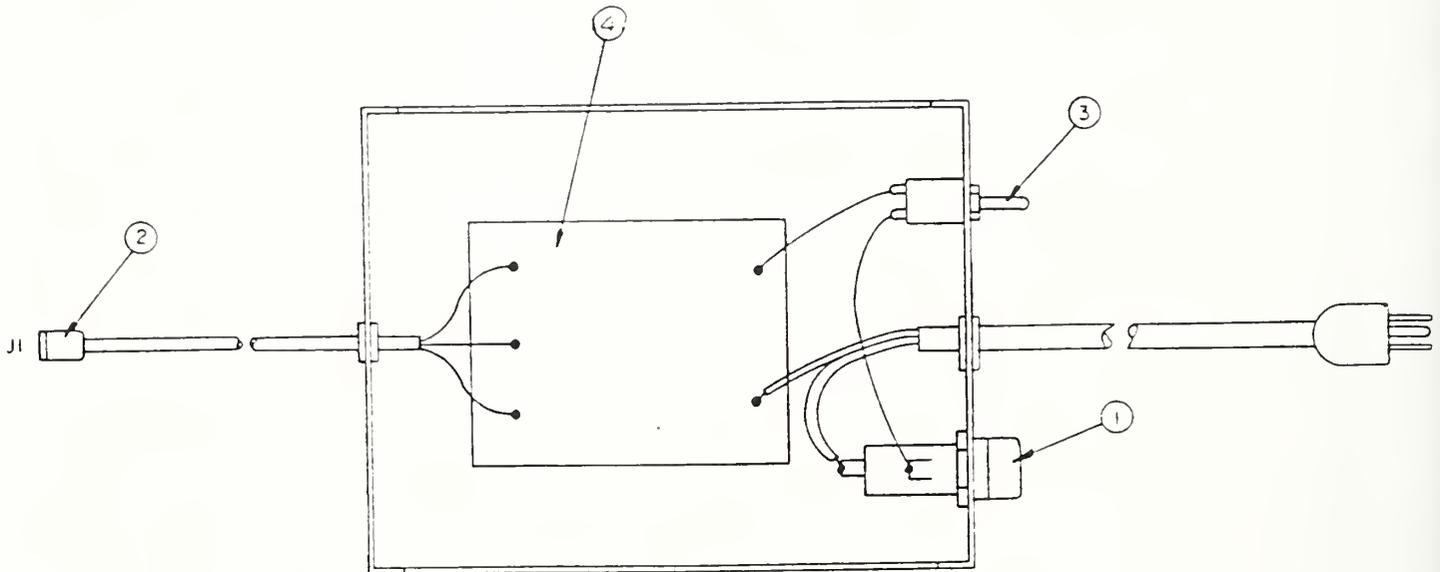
Power Supply for 3:1 Crest Factor Generator, Assembly Drawing
